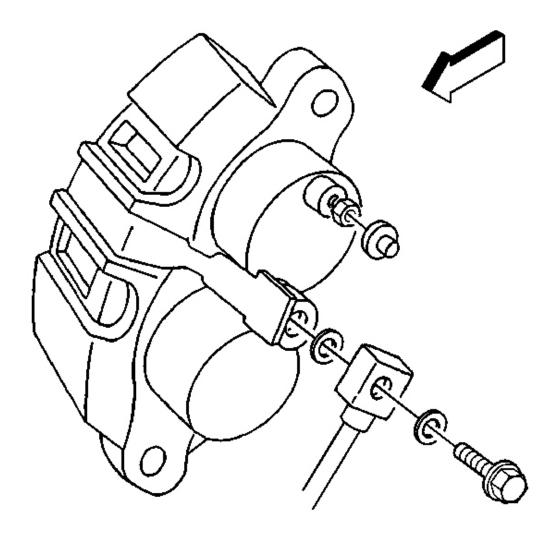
View Of Banjo Fitting To Caliper Courtesy of GENERAL MOTORS CORP.
